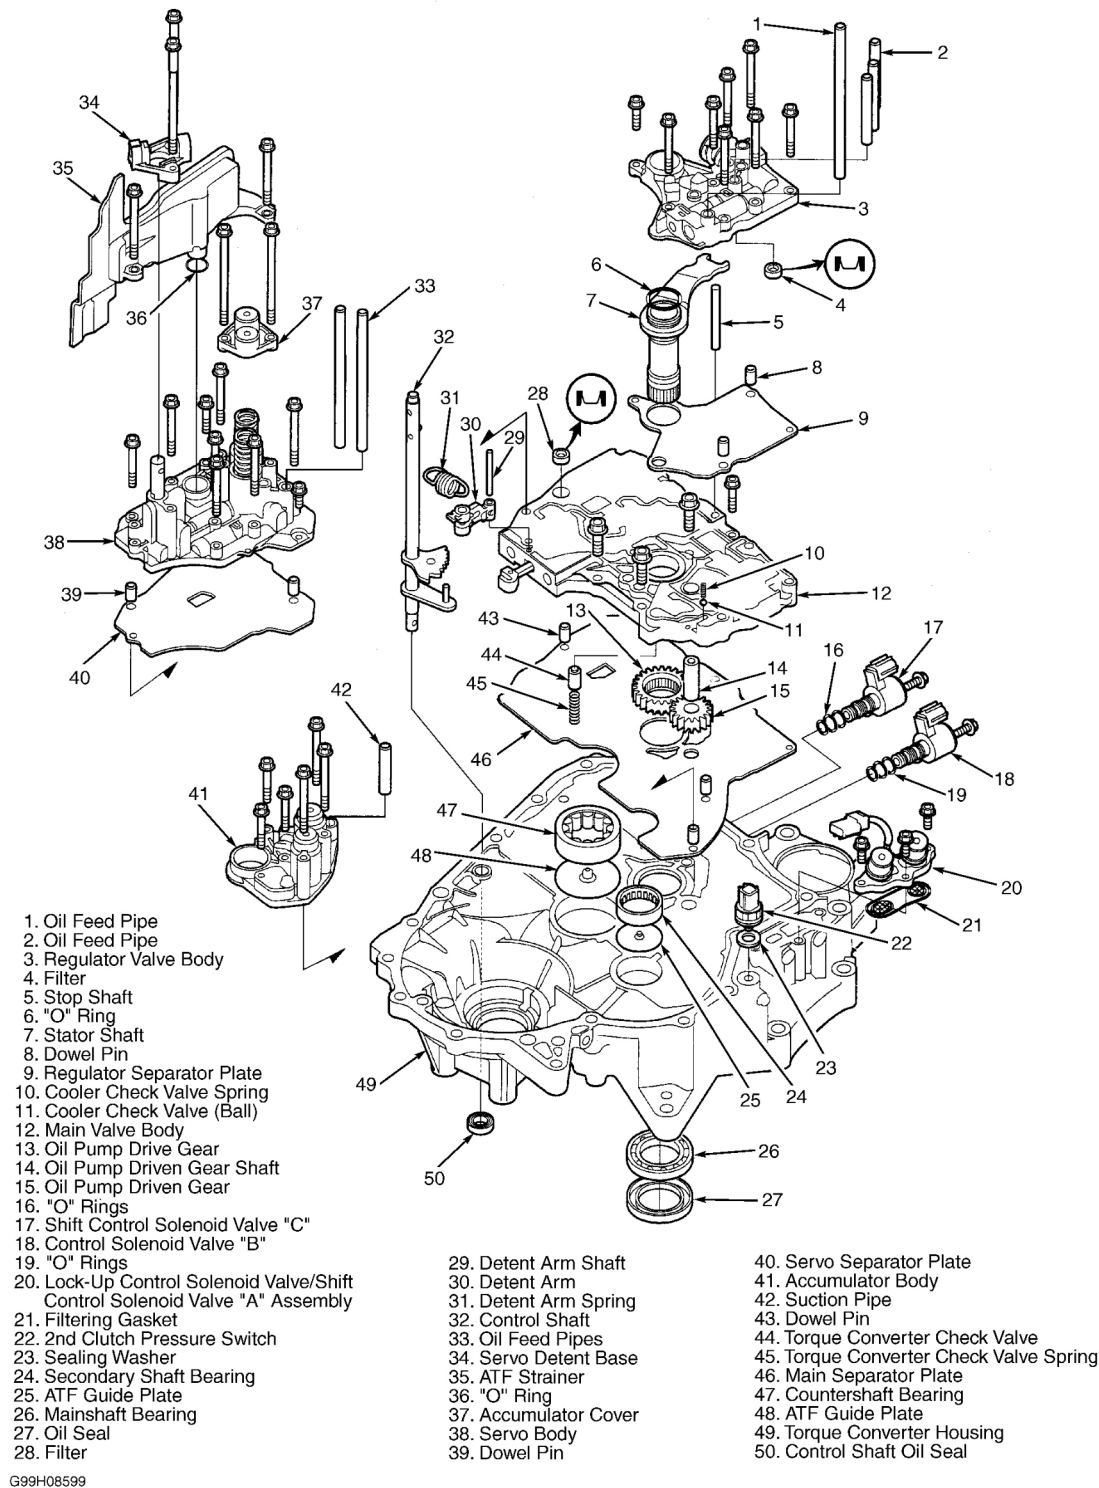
Exploded View Of Torque Converter Housing/Valve Body & Components
